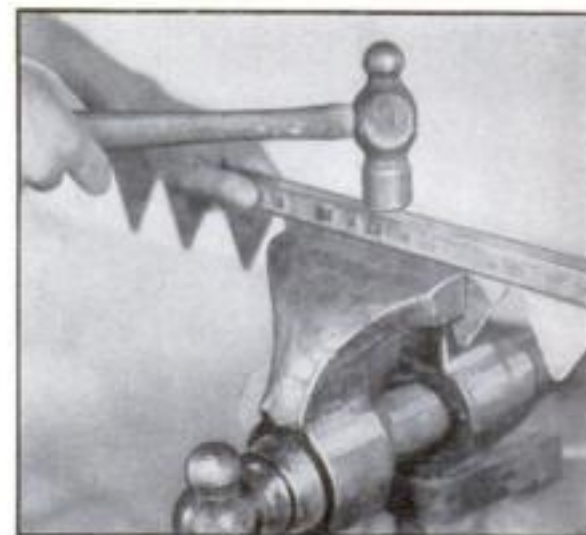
Removing a section from a sickle by shearing the rivets with hammer and vise
